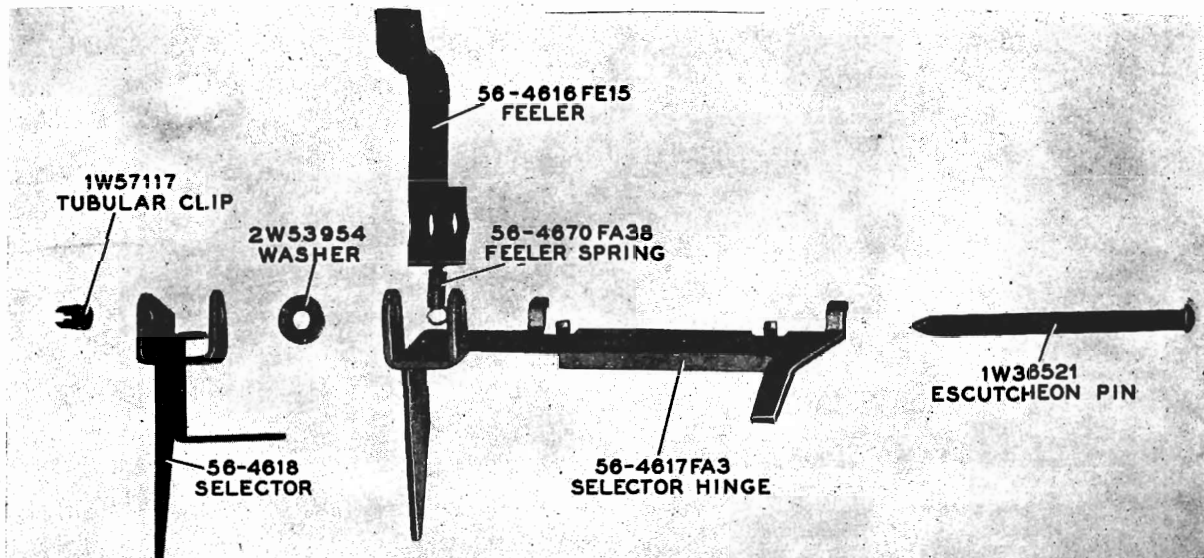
SELECTOR AND SELECTOR-HINGE ASSEMBLY
